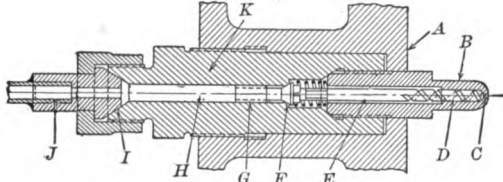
A SIMPLE FORM OF OIL-SPRAYING NOZZLE
